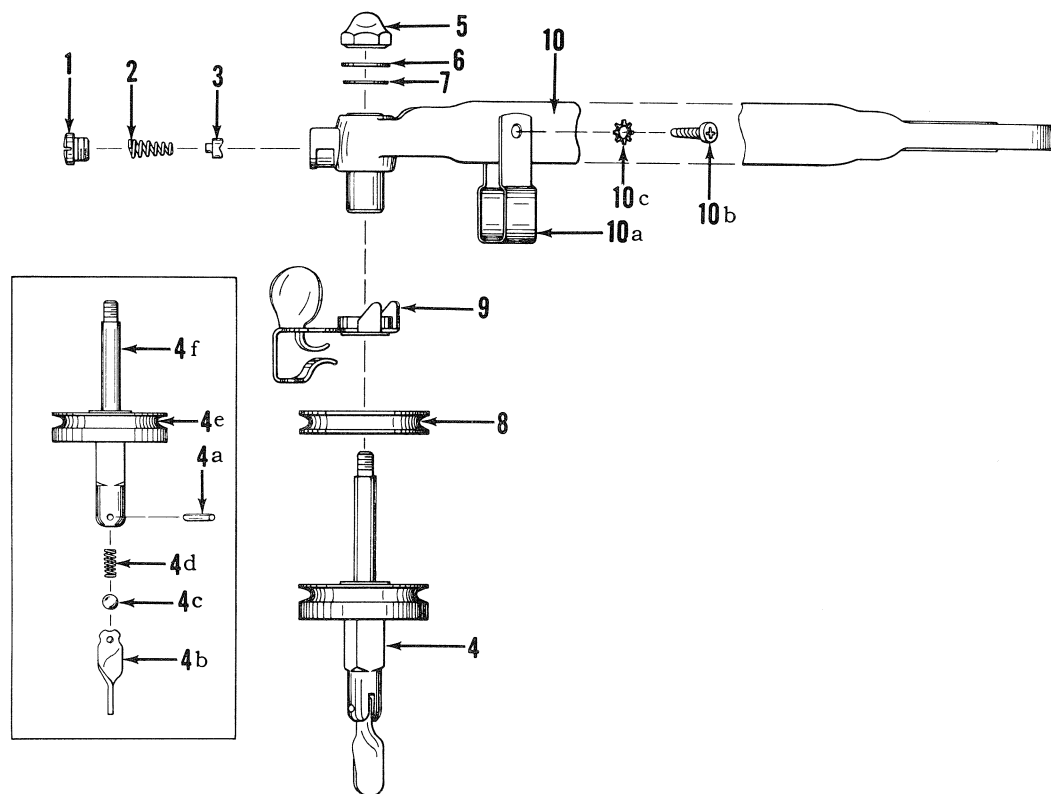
ARM ASSEMBLY - TAKE-UP REEL
